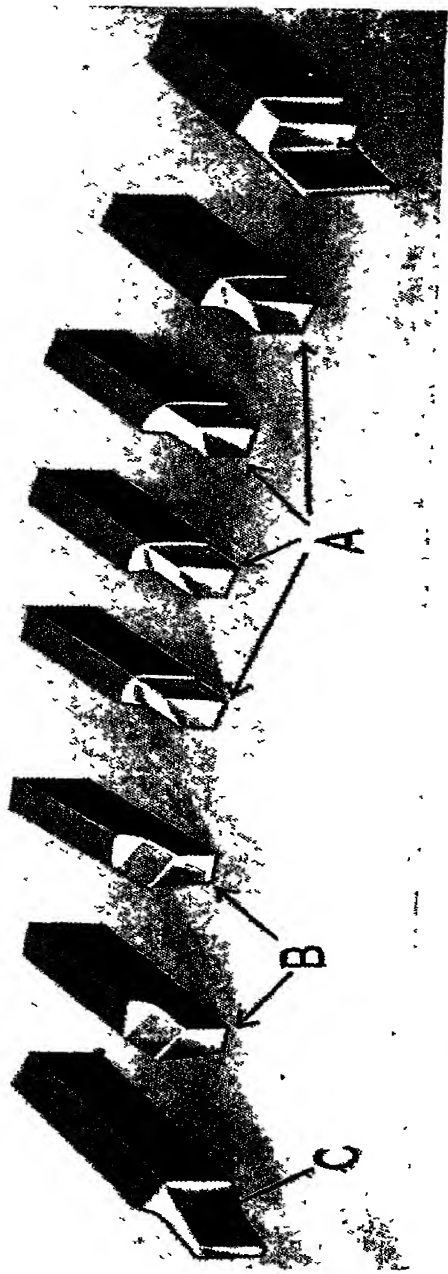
TURNING TOOLS FOR CAPSTAN AND AUTOMATIC LATHES
